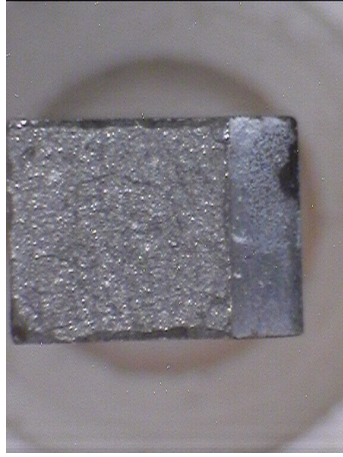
Tested impact specimens A4 04 after complete breaking (Macro)
